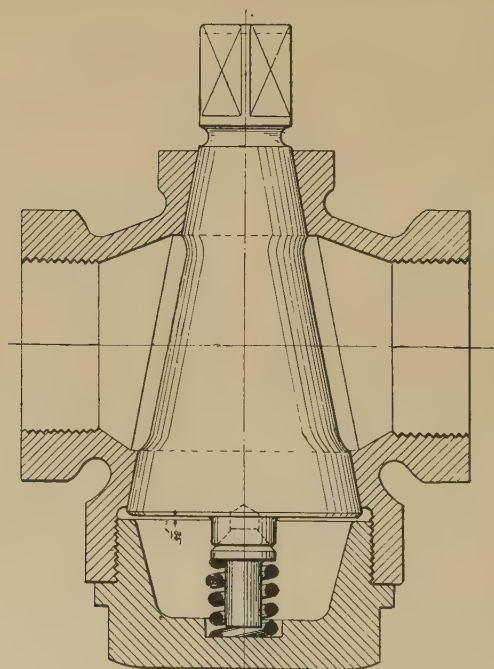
2" Steam Plug Cock fitted with Stainless Steel Plug.
